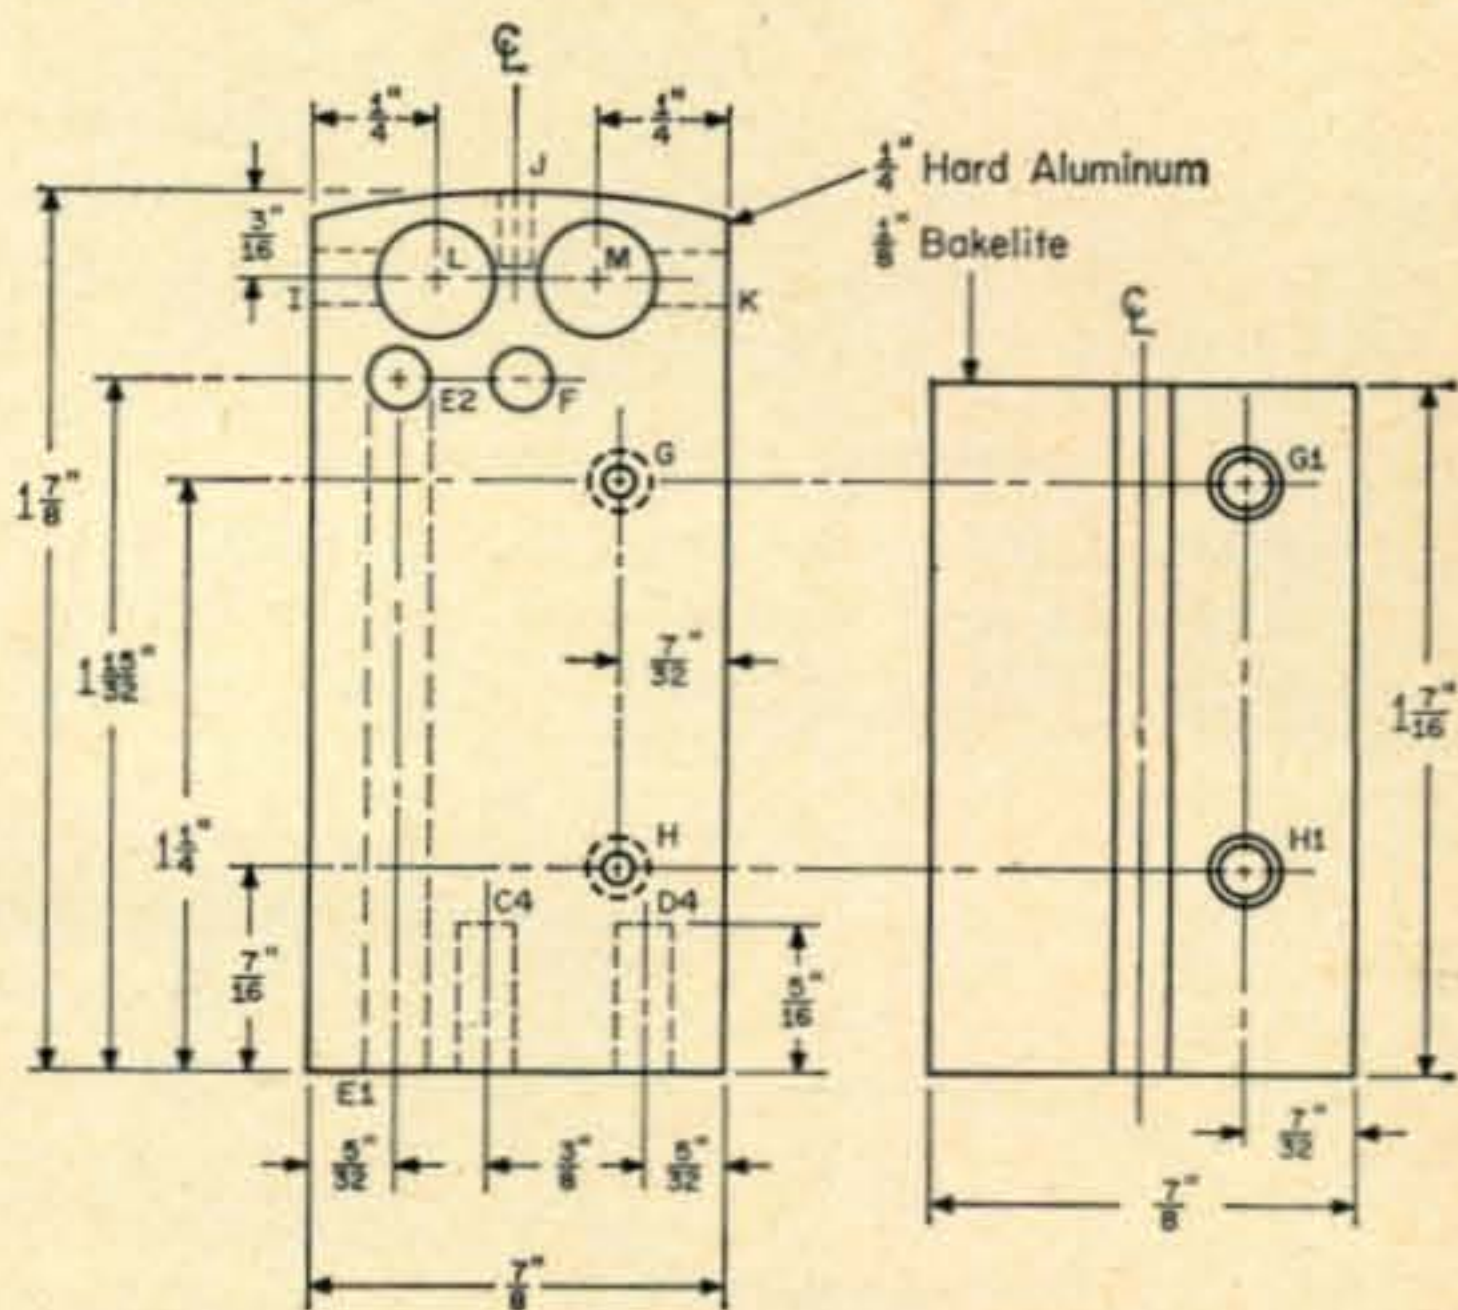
Construction details for the paddle pedestal. Holes C₄, D₄, G, H, I, K are drilled and tapped for 4-40 screws. Hole J is drilled and tapped for a 2-56 screw. Holes E₁, E₂ and F are $\frac{1}{8}$ ". Incline hole E₂ into E₁. Holes L and M are $\frac{1}{4}$ ". Holes G₁ and H₁ are $\frac{1}{8}$ " countersunk for 4-40 flathead screws. The groove shown in the bakelite pieces should be filed $\frac{3}{32}$ " wide and $\frac{1}{32}$ " deep. Two bakelite pieces are needed, one right and one left.
